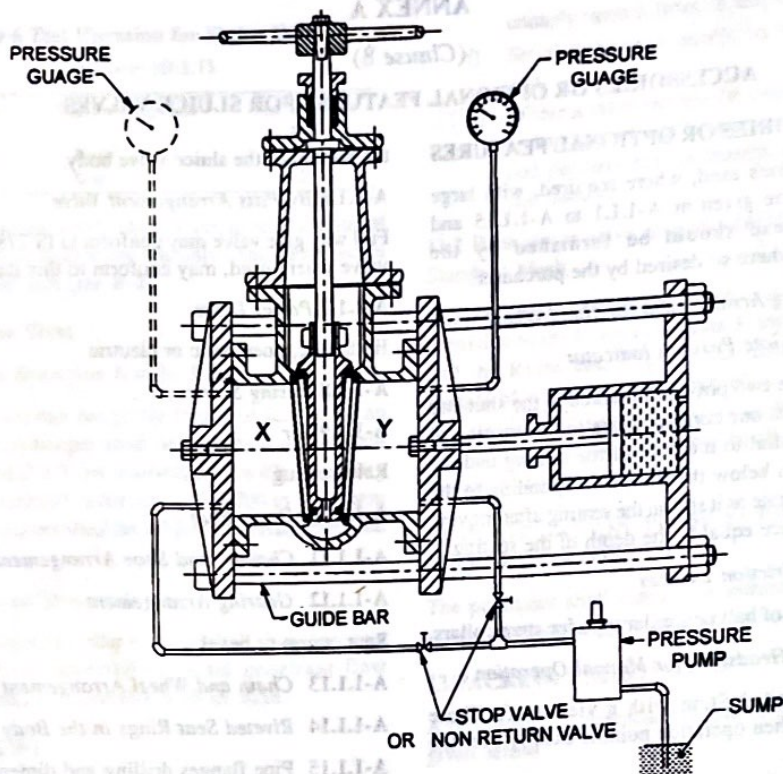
TYPICAL VALVE TESTING ARRANGEMENT FOR CLOSED-END TEST
